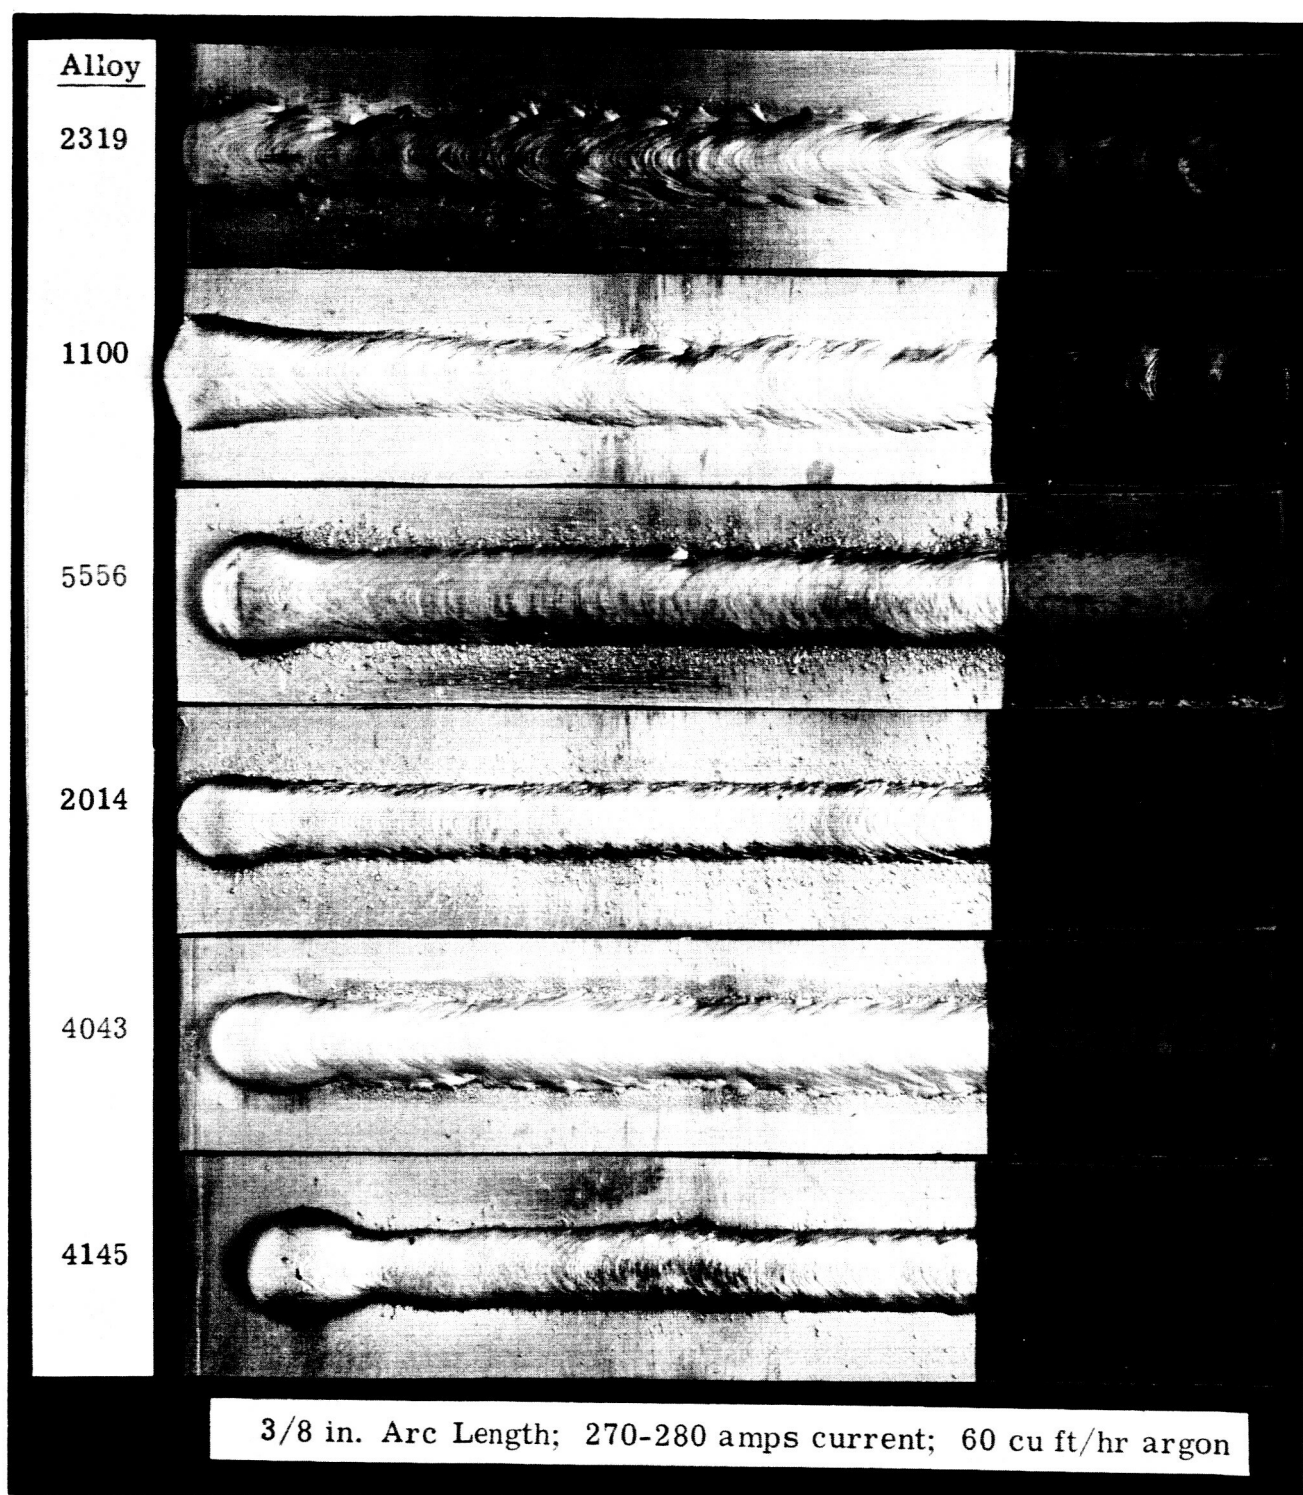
Photograph of weld beads deposited by 2319, 1100, 5556, 2014, 4043 and 4145 electrodes
